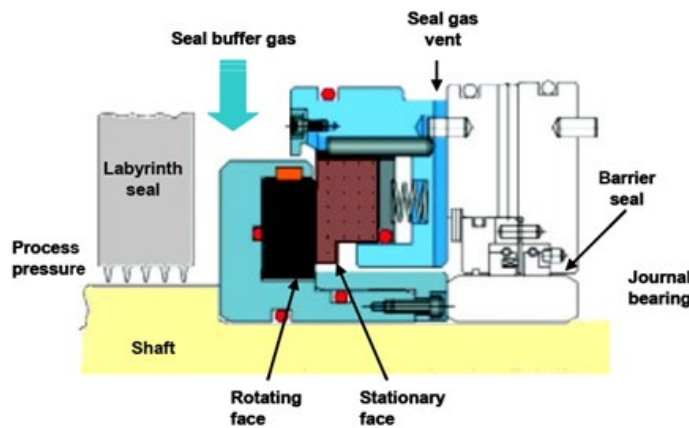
Dry Gas Seal Shaft Friction -Contact Area
